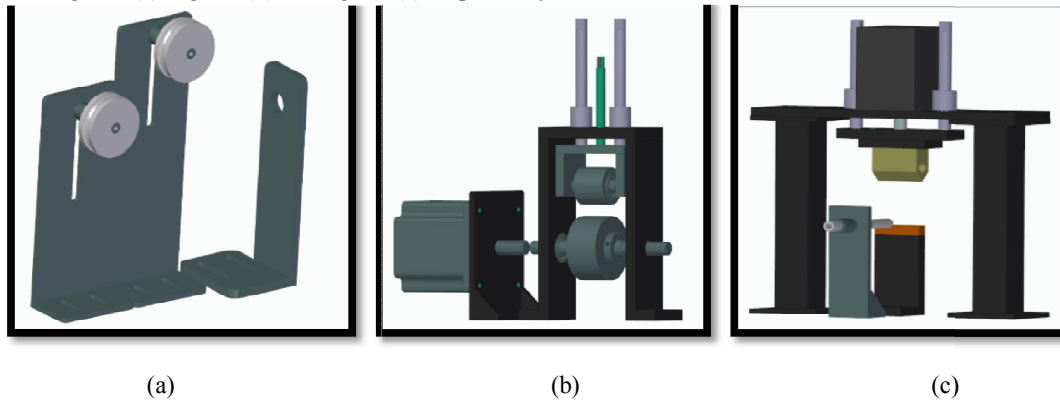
(a) idler section, (b) roller section and (c) cutter section
